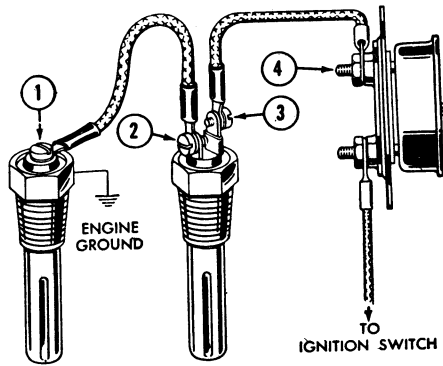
FORD and KING-SEELEY. Showing check points for testing temperature gauges when two engine units are used
